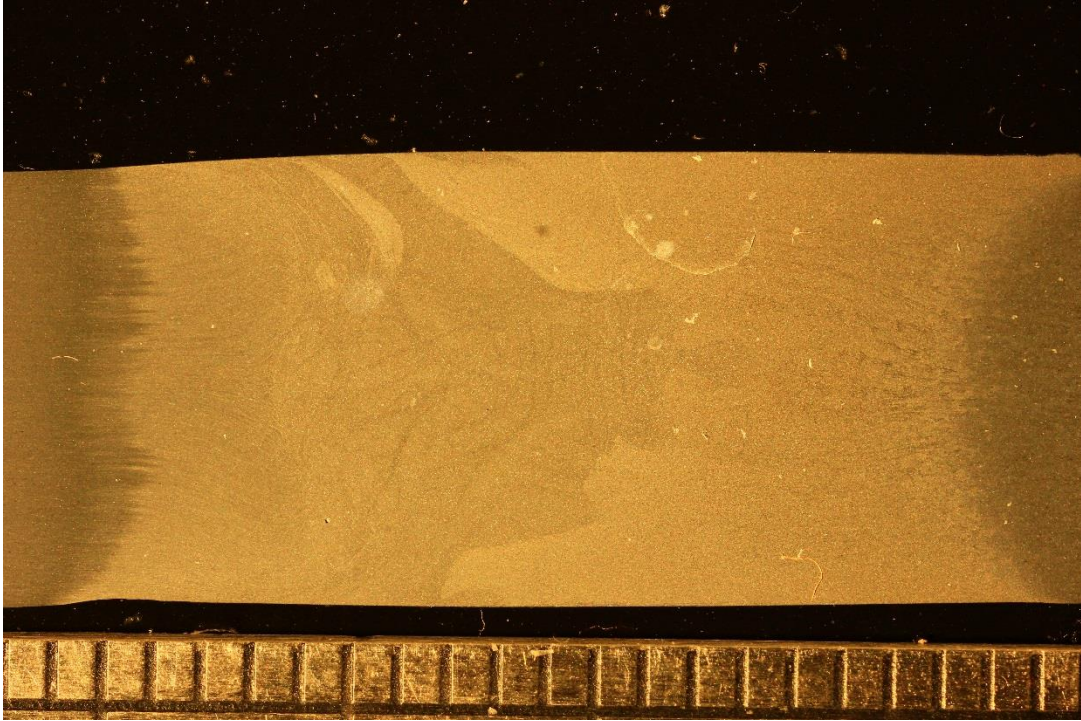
Macrograph of Weld 2 Sample 5
